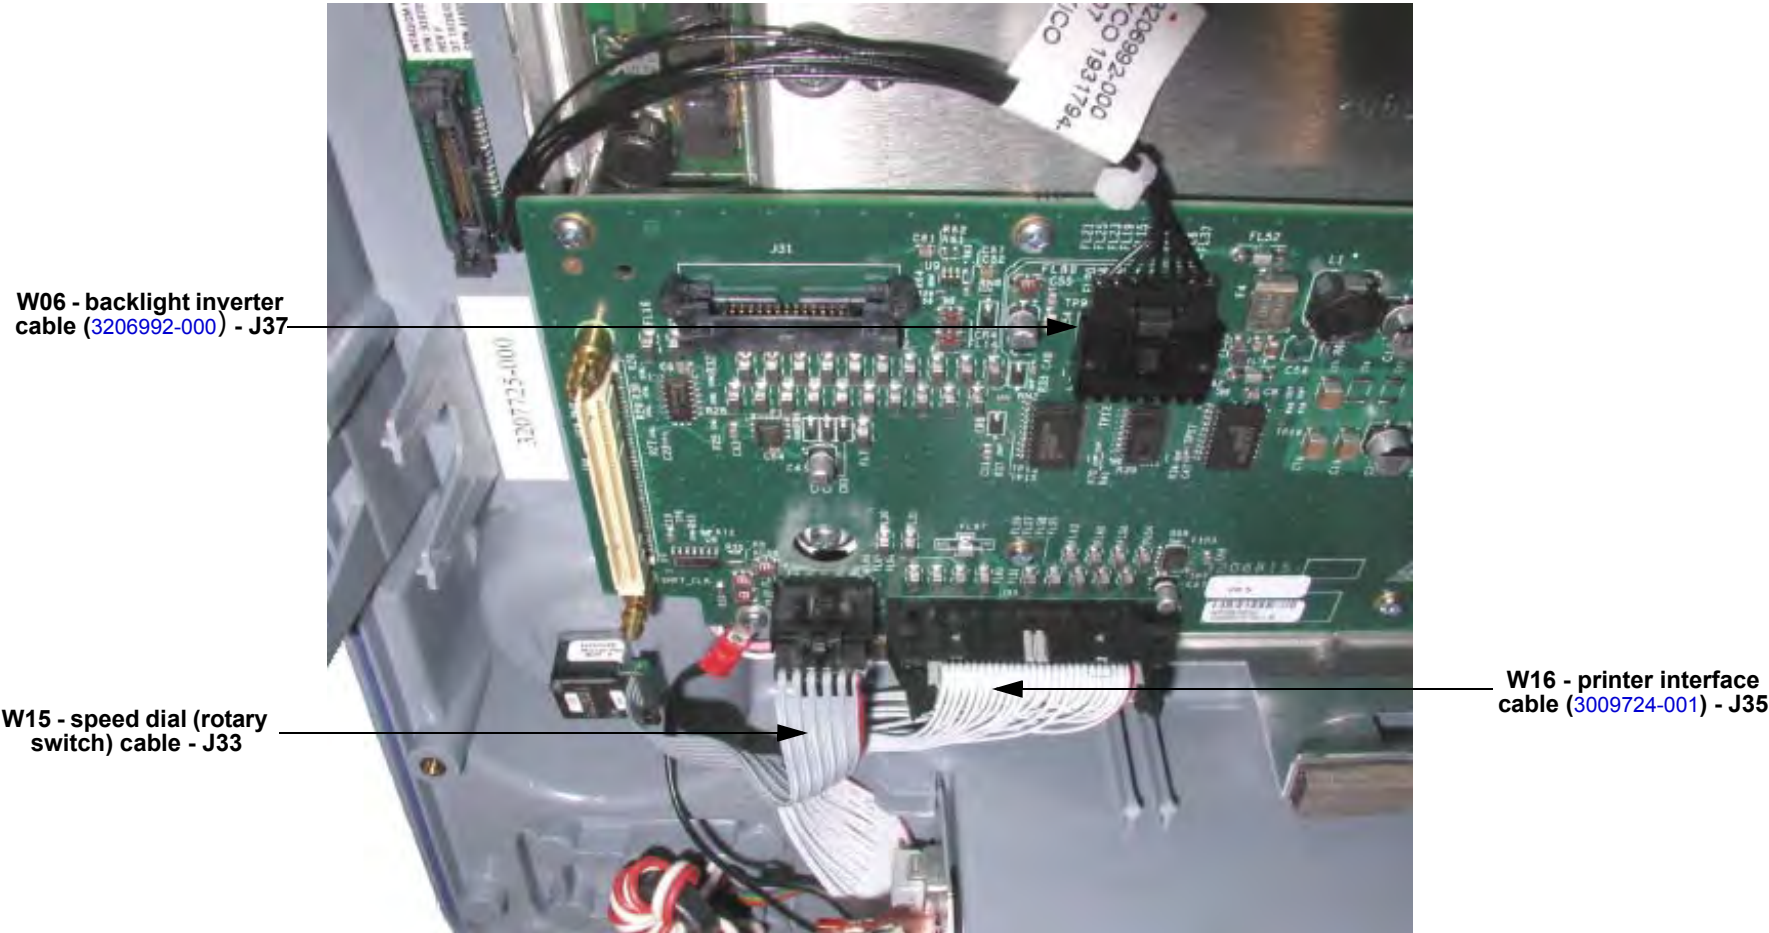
Interface PCB cable connection locations - view 2 of 2
